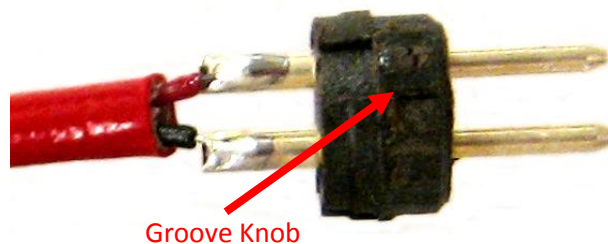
Solder the leads to the top two pins, using the groove knob to identify them.
